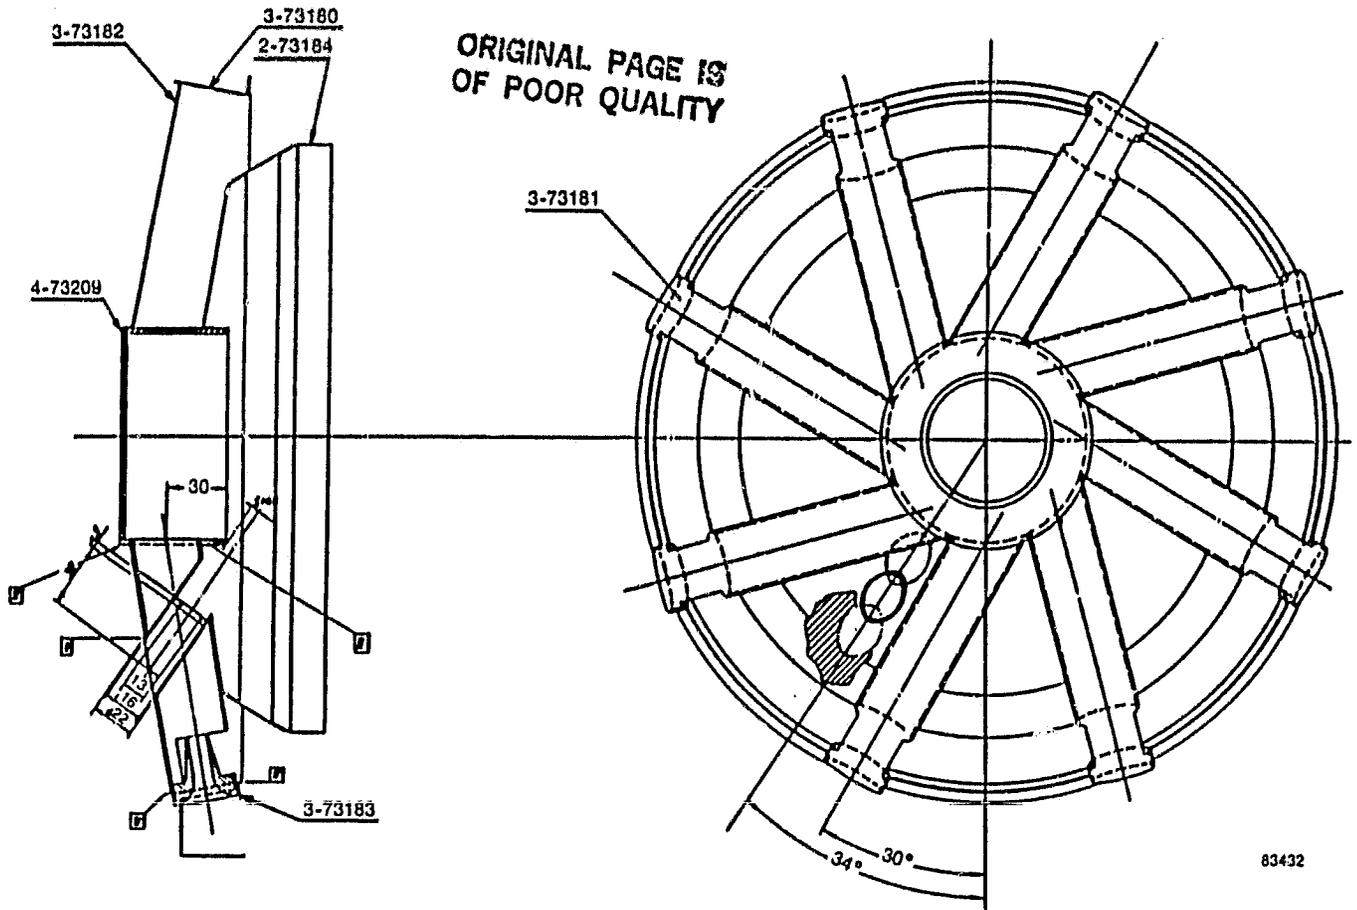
USAB Tubular CGR Combustor (Early Version)
